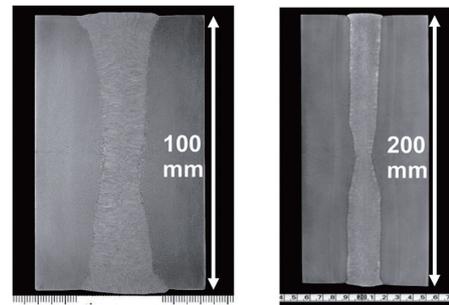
Macrostructure of welds 100 mm and 200 mm thick with four-electrode VEGA® welding process
